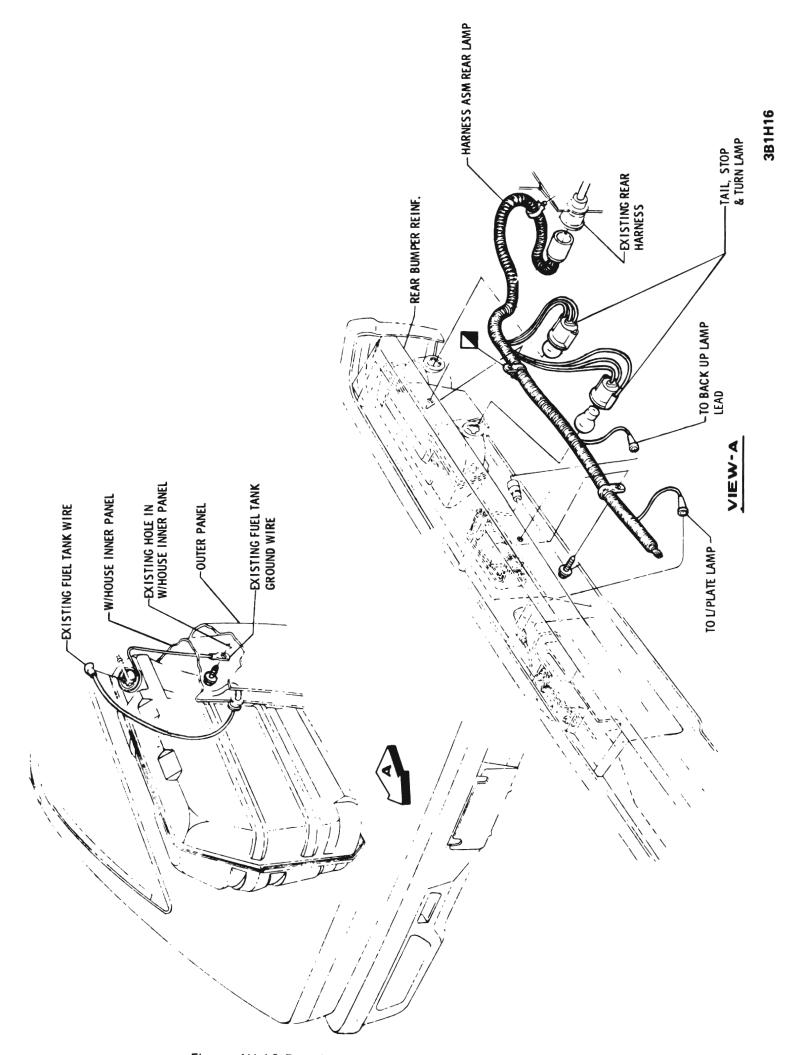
H-16 Rear Lamp and Fuel Gauge Wiring "A" Wagon
